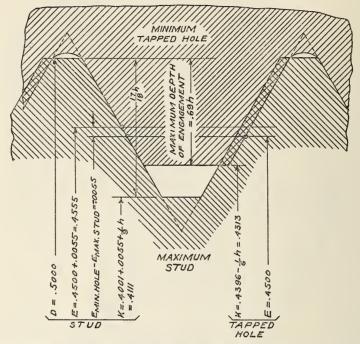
Illustration of tightest condition for class 5, wrench fit for threaded studs, one-half inch, 13 threads, set in hard materials.
